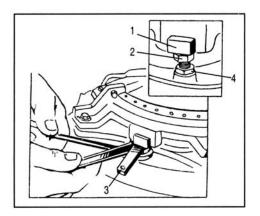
Adjustment of Clearance Between Release Bolt and Hold-down Plate Club of Assistant Friction Wafer
